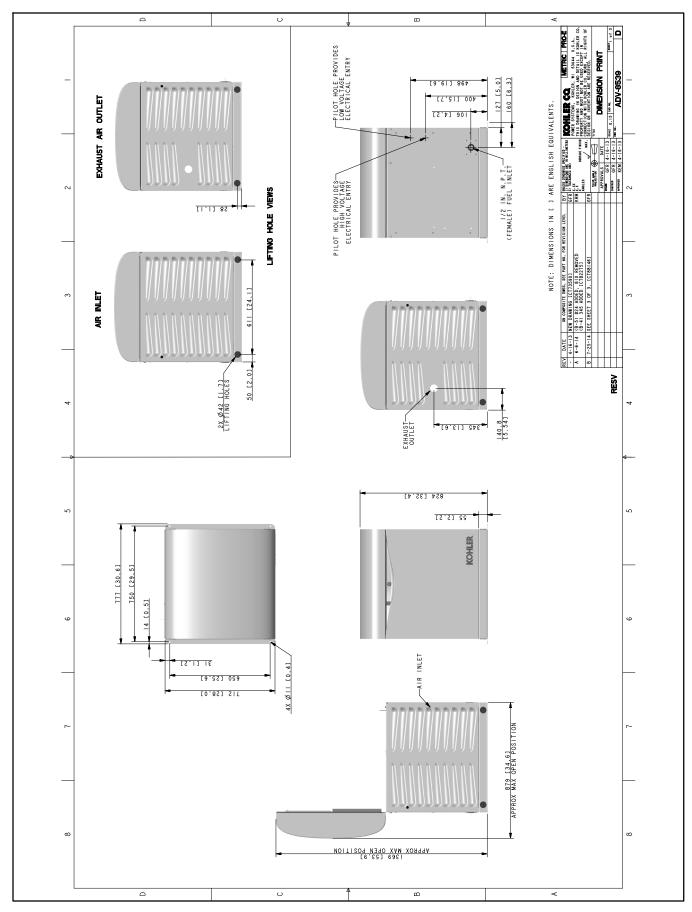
Dimension Drawing ADV-8539, Sheet 1 (for specification numbers GM88347-GA6 or lower)
